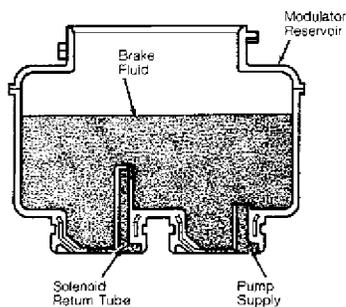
Locating Sol. Return Tube In Modulator Reservoir (Typical)
